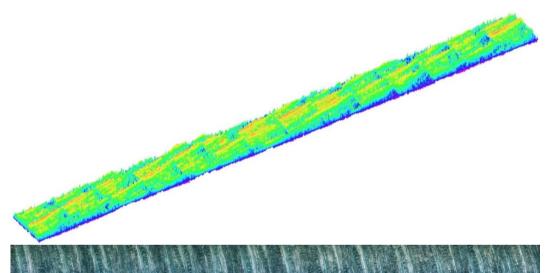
The 2D and 3D images of the surfaces machined with the high-speed milling cutter (the fifth mode).
